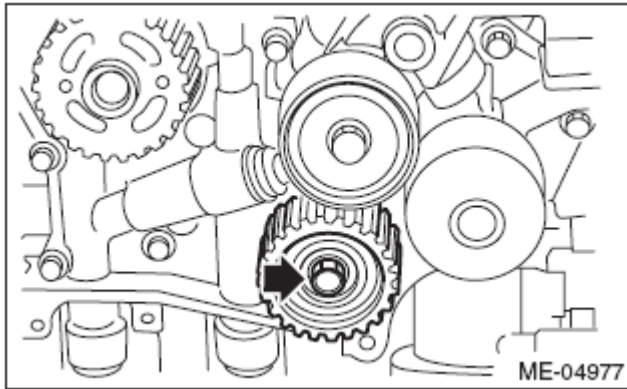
Locating Automatic Belt Tension Adjuster Assembly Bolt
